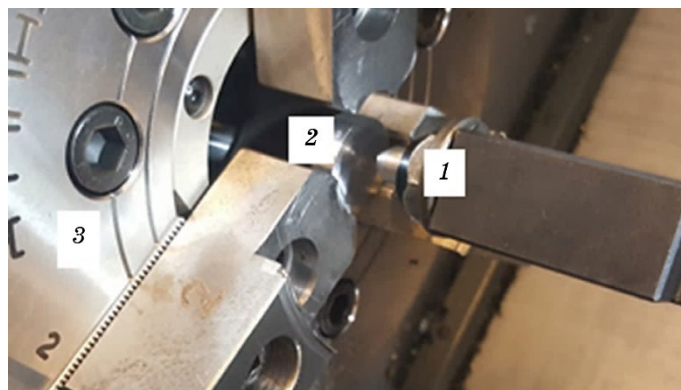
The process of sliding burnishing of the sample surface: 1—DB-3 burnishing tool, 2—sample, 3—three-jaw chuck.
